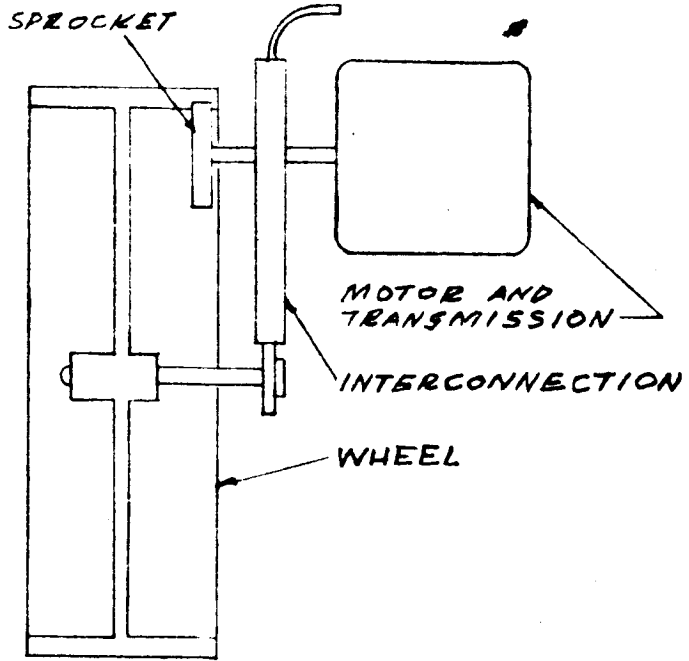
Motor, Transmission, Wheel, and Interconnection Assembly
